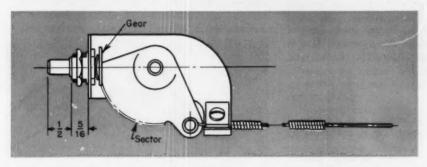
Sector and gear provide rotary output motion. The cable end moves in an accurate path.
